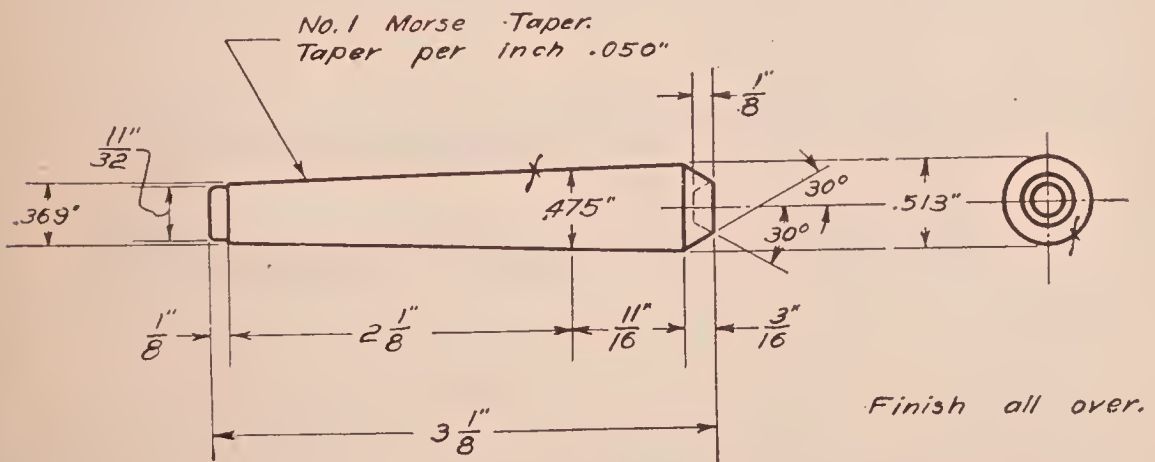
A cylinder drawing with dimensions. (From South Bend Lathe Book).
